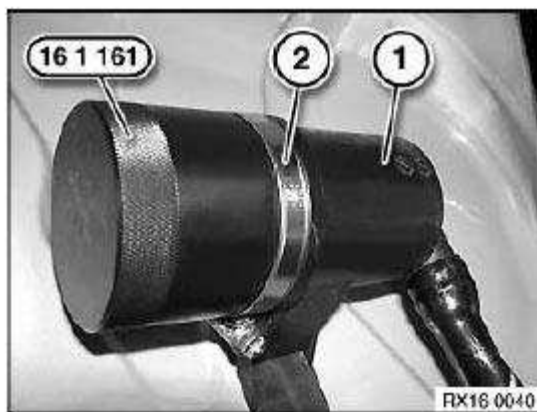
Hose clip, Housing Of Dust Filter And Special Tool (16 1 161)
